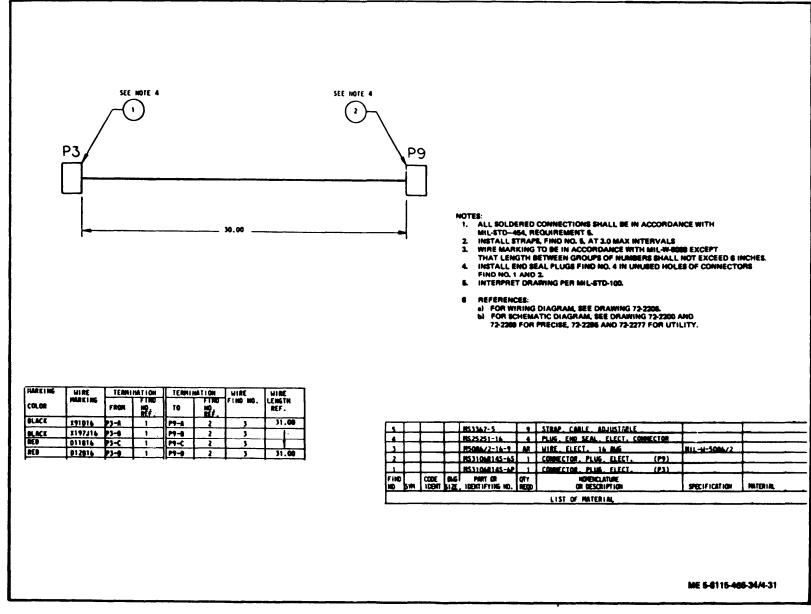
Special Relay Assembly to Static Exciter Assembly Wiring Harness, Drawing No. 72-2220
